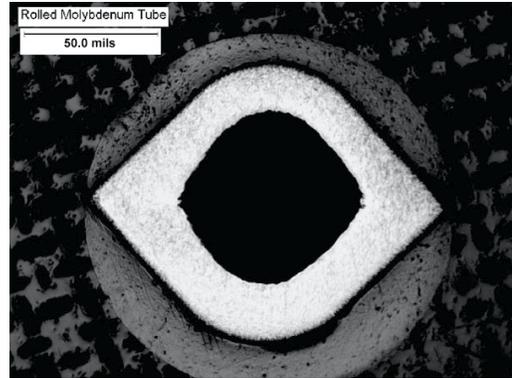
Photomicrograph of the cross section of a diamond shaped molybdenum source grid rail produced in the new grid rail fabricating machine.
